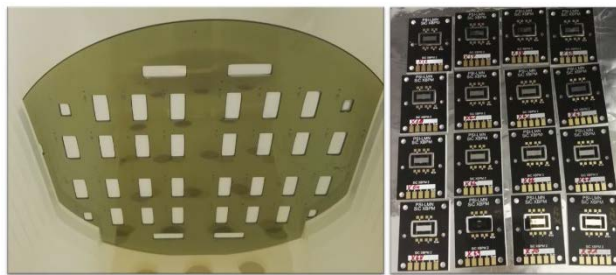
Picture of the produced XBP on wafer (left) and on PCB board (right).
